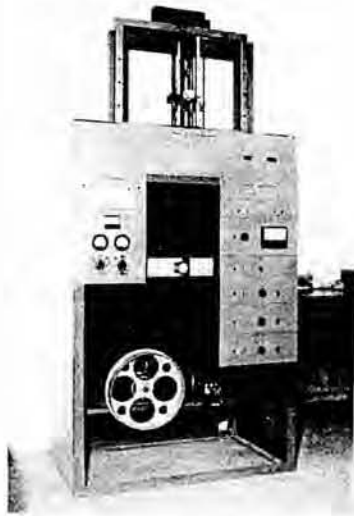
Photograph of the fiber drawing machine designed and built at CSIO.
